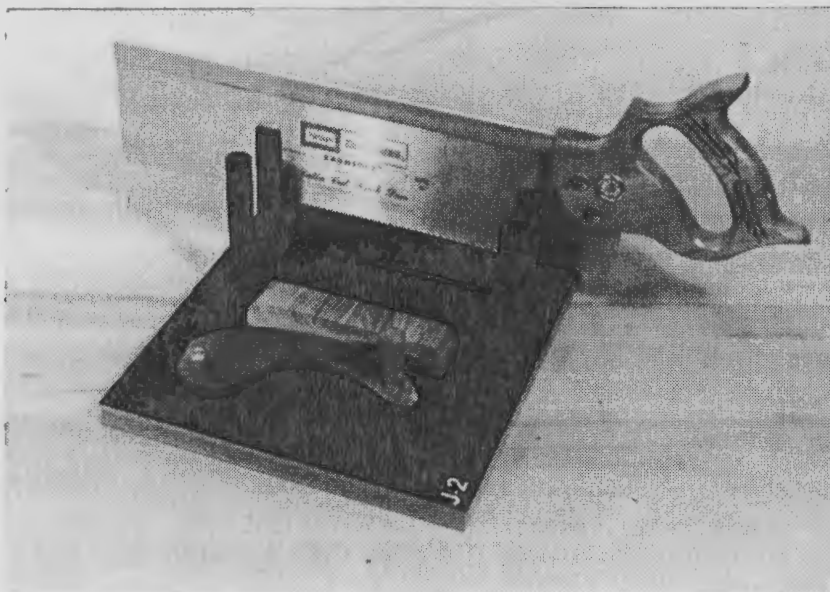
Figure II. The game pattern was cut into the pre-sized component using this special jig and backsaw.
